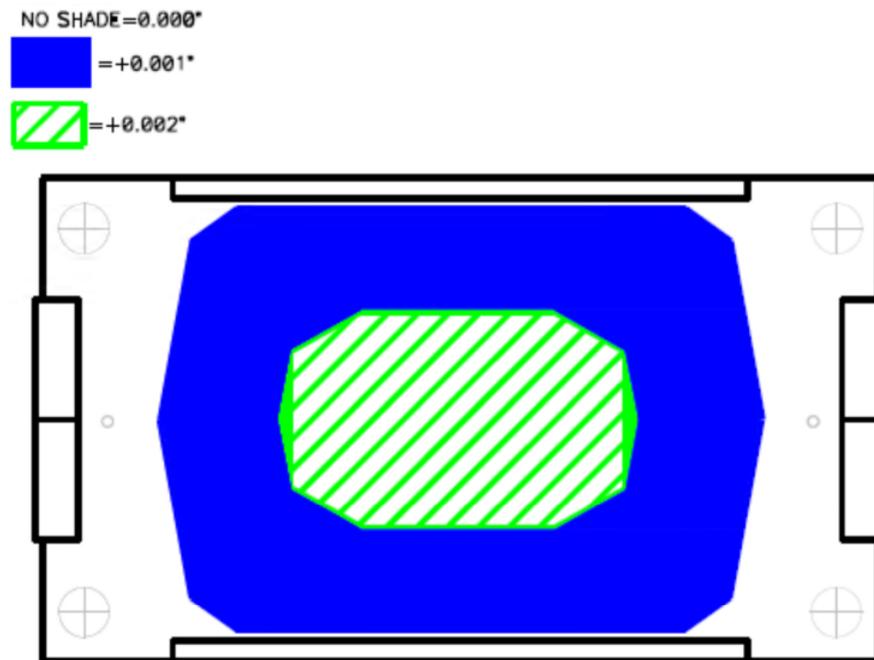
Inspection block measurements of module showing slight convexity, bottom side facing up.
